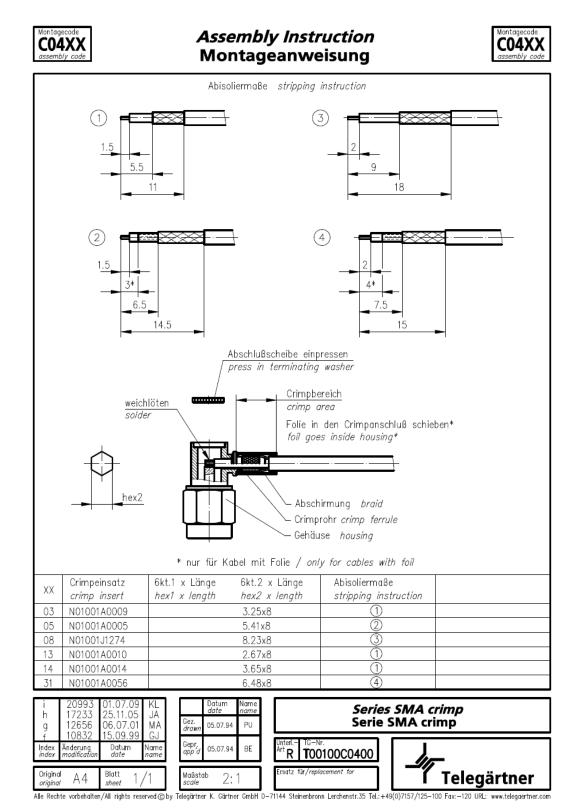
Assembly instruction SMA, angled, SISO3 side
